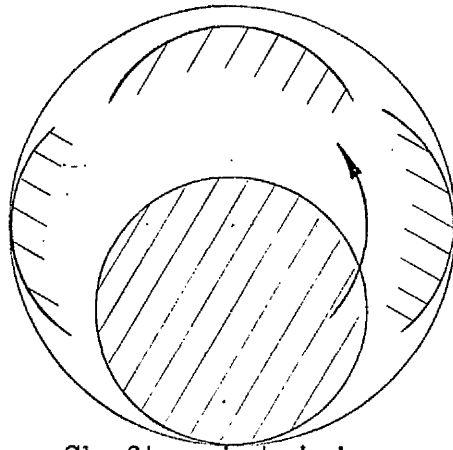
(b) Shaft maintaining contact with bearing throughout only part of rotation.
